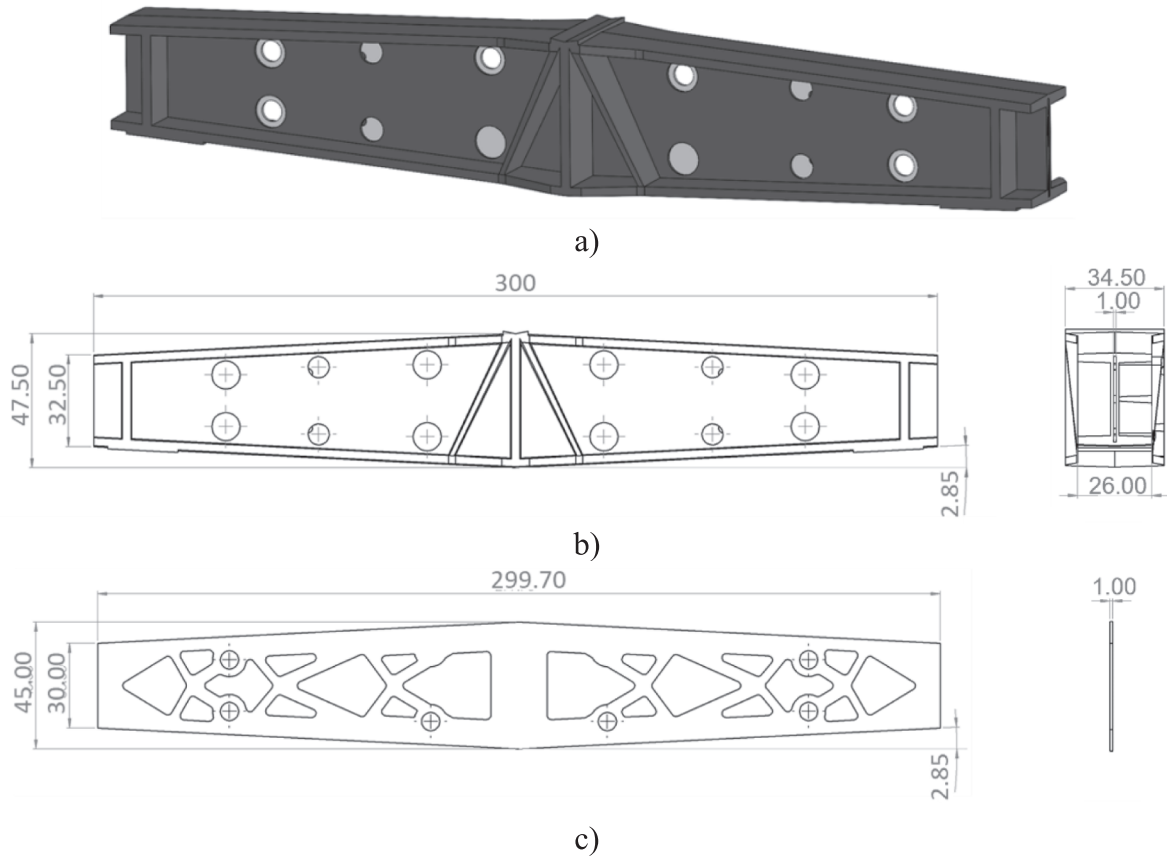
A) CAD model of the PMH demonstrator and drawings of the front and lateral views of the b) main composite structure and of the b) aluminium insert.
